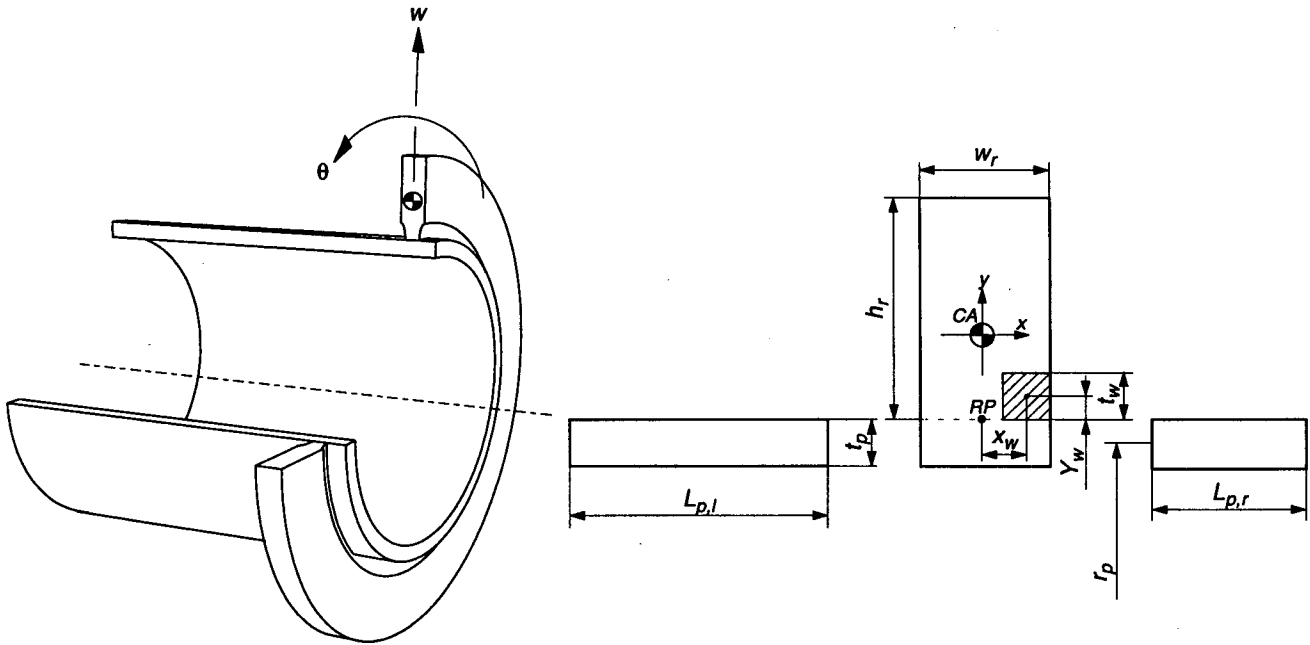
Geometry of pipe-ring-stiffener assembly. Locations of weld passes are indicated.
